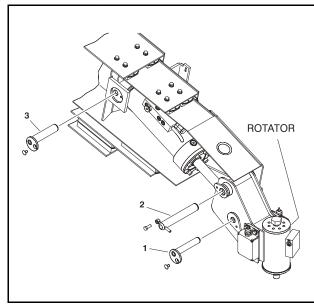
Reassembly of Components-Rotator and Leveling Cylinder
